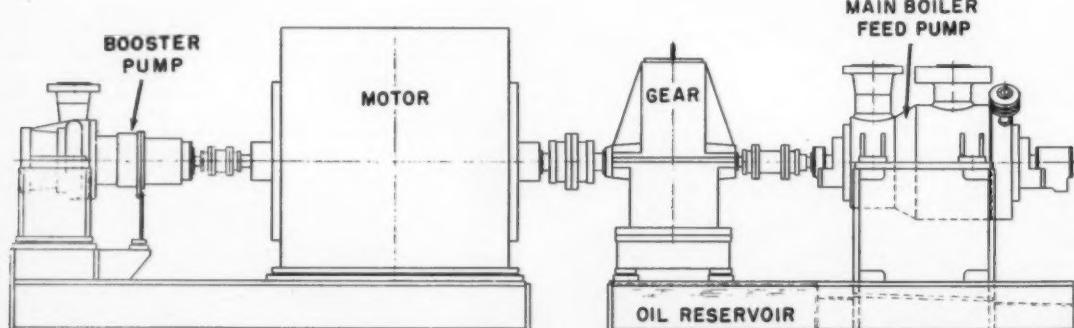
The usual arrangement for the drive of a booster pump is to employ a shaft extension of the main feed pump drive.
